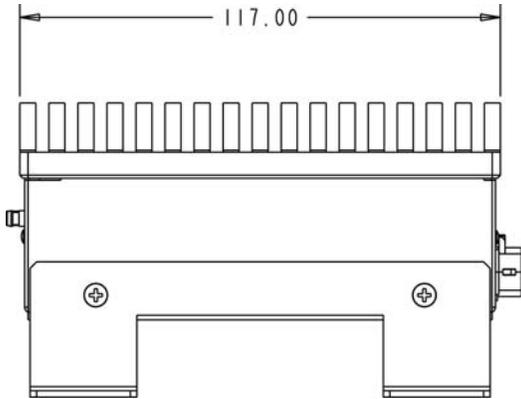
CL-Ten Full External Frame Grabber Enclosure - Back View
